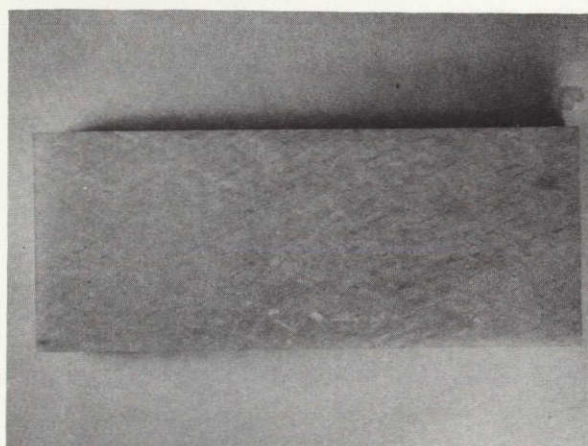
S21D85/Aluminum Honeycomb Core/S21D-104 Structural Sandwich Assembly (Overall Dimensions: 8" x 3" x 0.8")
